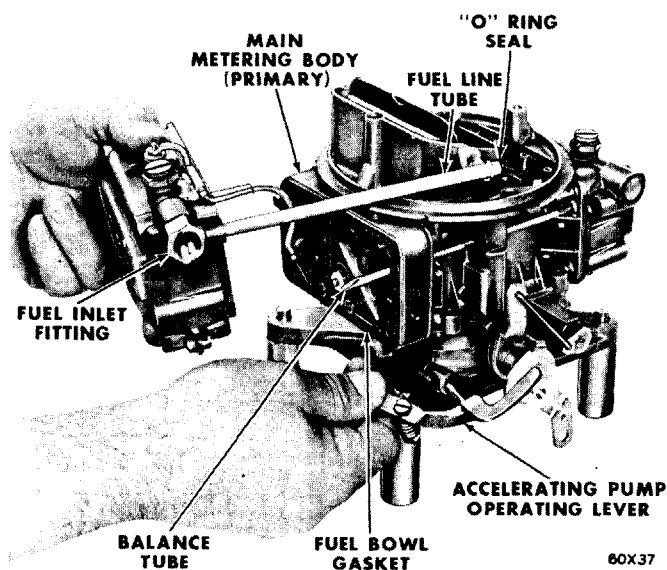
Removing or Installing Pump Lever and Fuel Bowl
